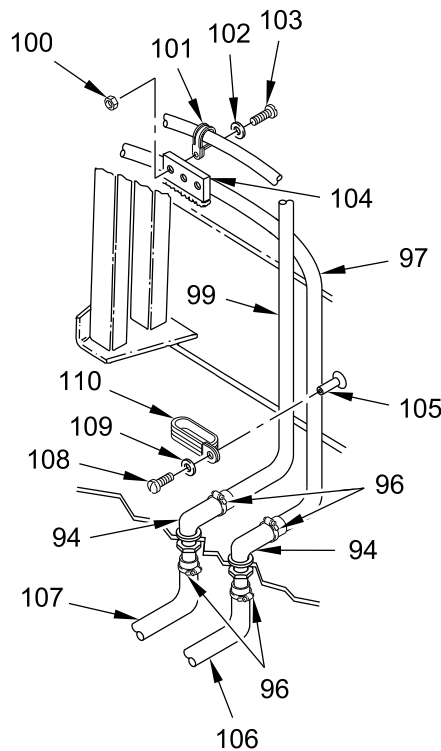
Driver's Floor Plate Hoses/Clamps – Installation.
